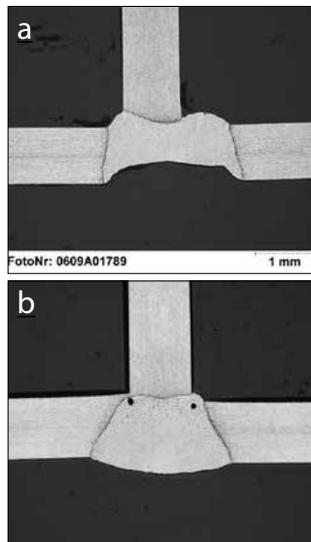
Cross section of a scanner welded part: (a) with undercut due to gap formation;
